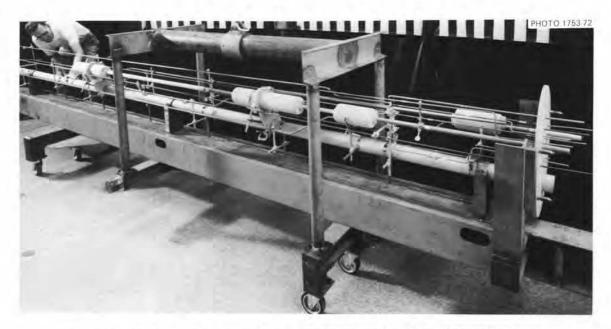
Wood and steel mockup of the molybdenum test stand installed on the assembly jig.
